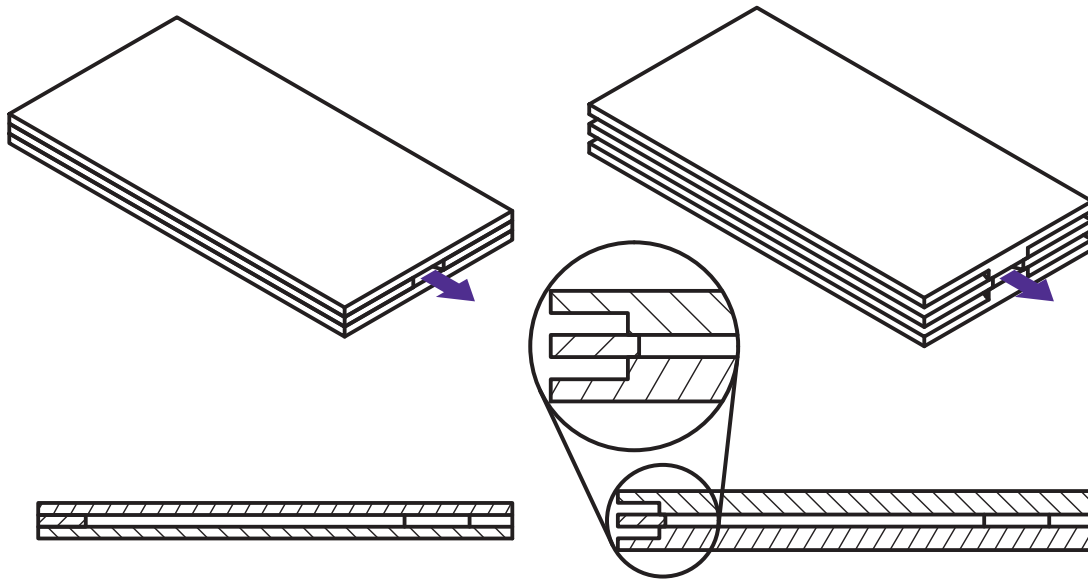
Two primary nozzle profile sealing concepts: diffusion welding (left) and soft metal clamping (right). Nozzle exit flows are indicated with purple arrows.
